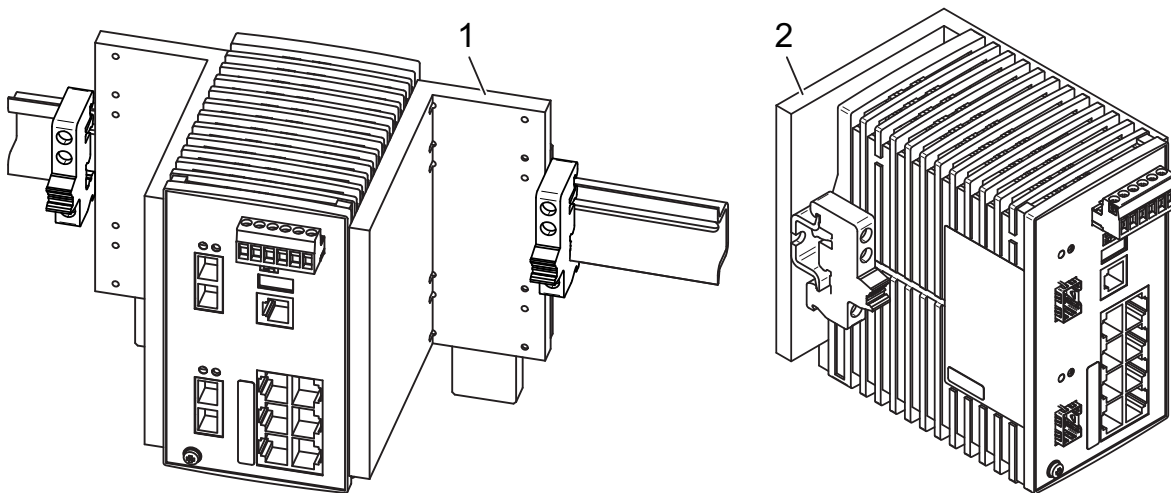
Assembly of the RS30-0802... on ships with Open Rail assembly kit
